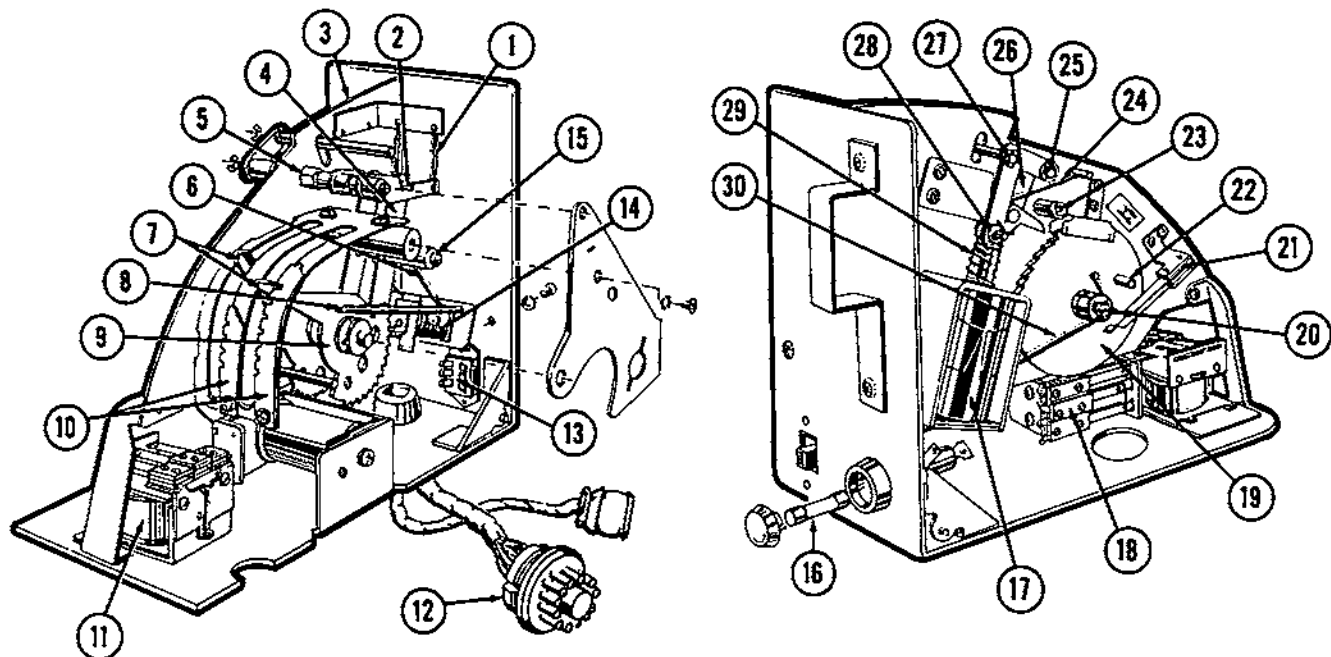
COIN REGISTER ASSEMBLY (PLAYRAK)
